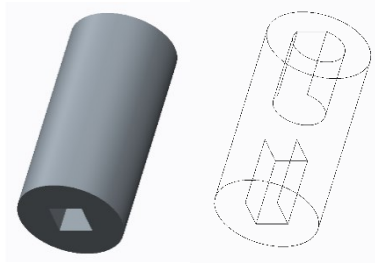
CAD model of 3D printed VEX shaft-to-motor shaft adapter
